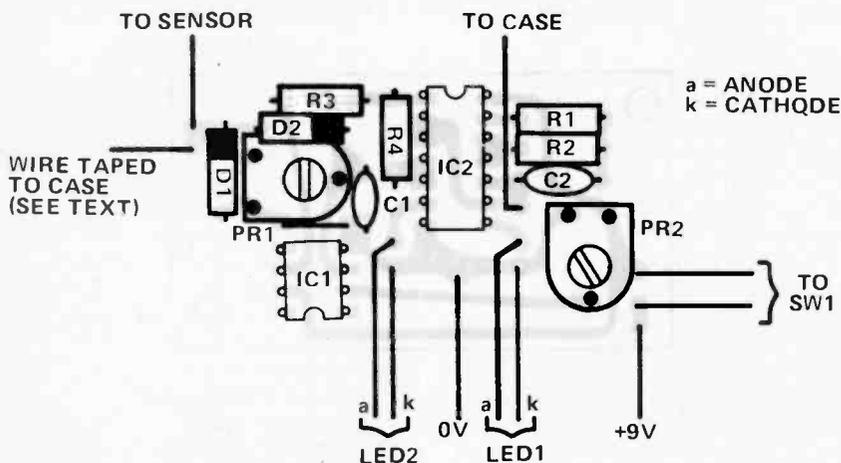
Component overlay of the ET1 Bodywork Checker.
